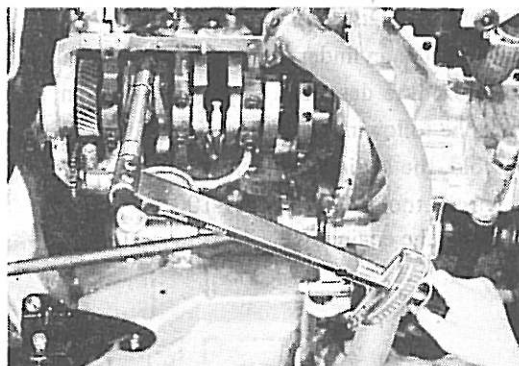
Tightening Connecting Rod Bearing Cap Nuts
